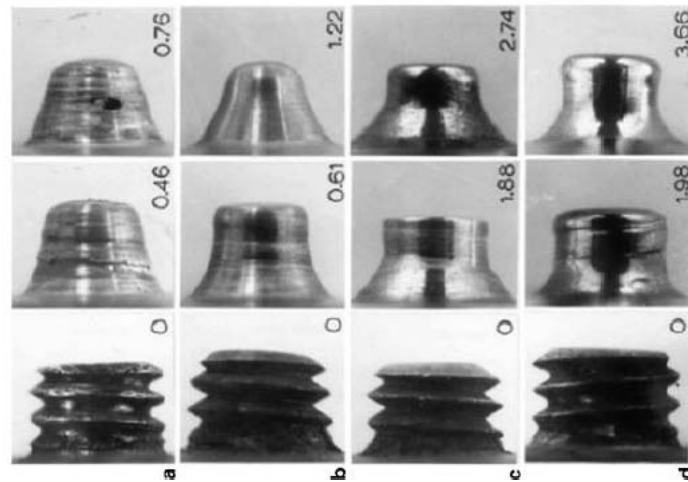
Wear features of probes for Al-MMC at 1000 rpm: welding speeds at a 1, b 3, c 6 and d 9 mm/s [21]
